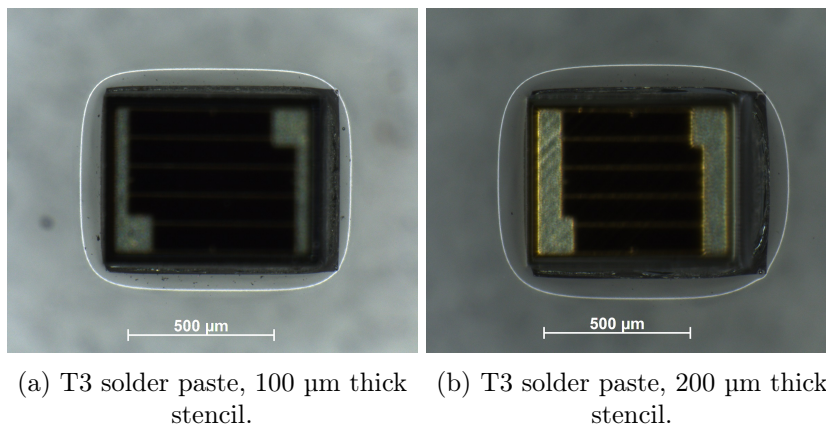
Pictures of the solder paste on the pads after reflow.
